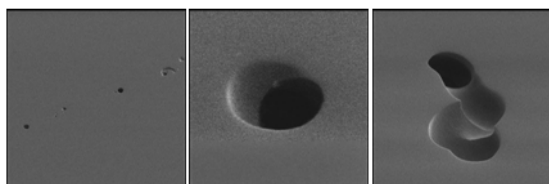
Silicon wafer pit defects related with mechanical grinding damage and following wet etching
